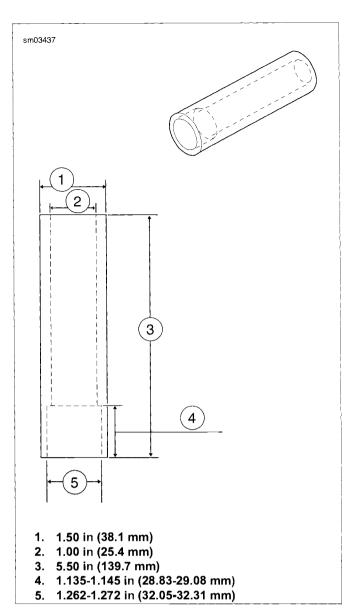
Pinion Shaft Inner Race Installation Tool
